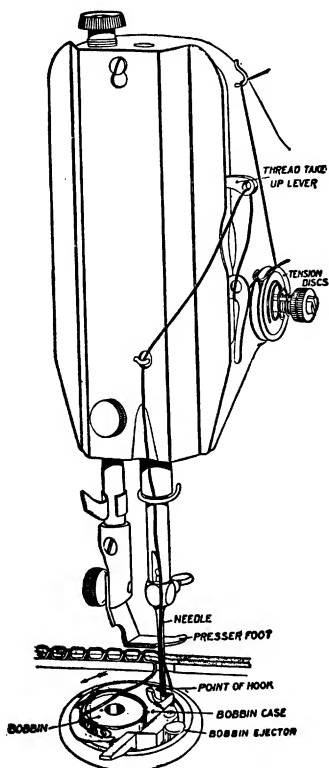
Illustrating the method of forming stitch with the oscillating shuttle.
